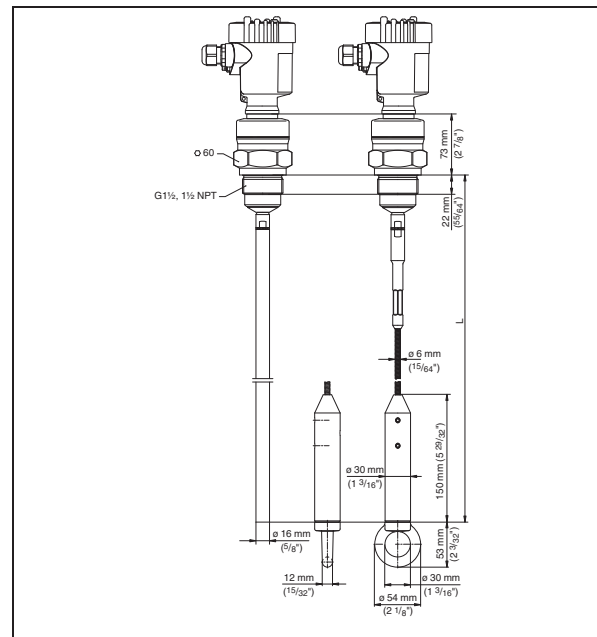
VEGAFLEX 62 - cable and rod version with thread
